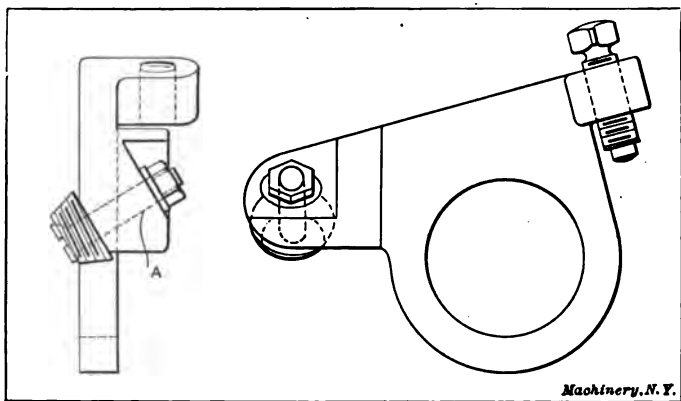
Cross-slide Holder for applying a Thread Roll to a Beveled Piece
